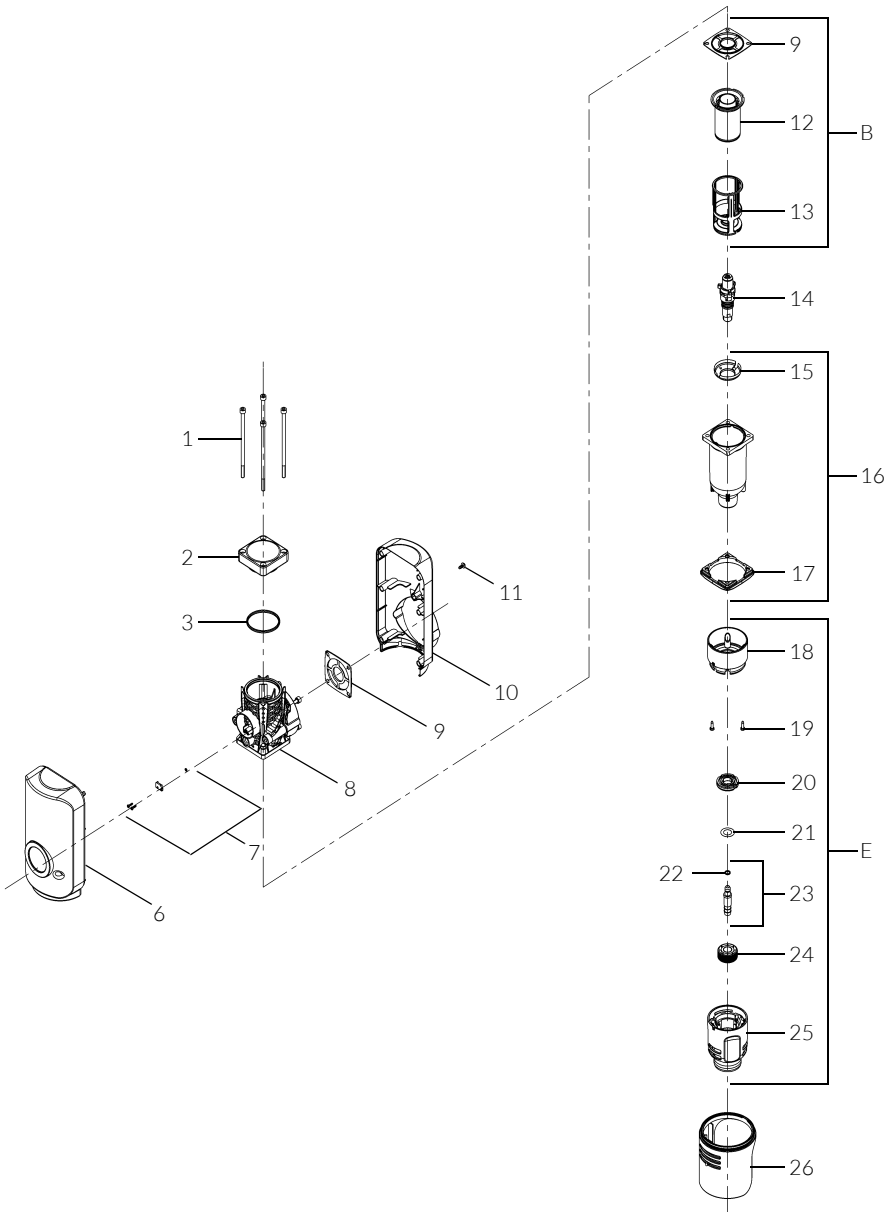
Spare parts CLEAR 2.0 R 3/4" - 1 1/4"
